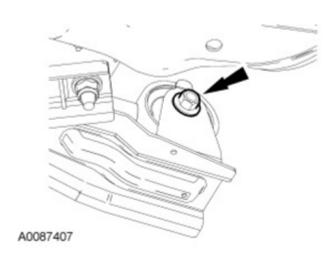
Locating Lower Transaxle Insulator Through Bolt Courtesy of FORD MOTOR CO.
